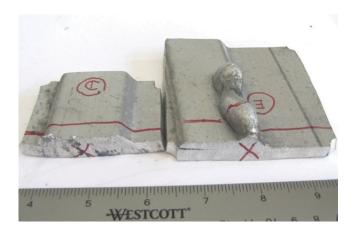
Inside surface pieces of the seam weld near the failure showing an ordinary weld (left) and a hot spot weld (right).
